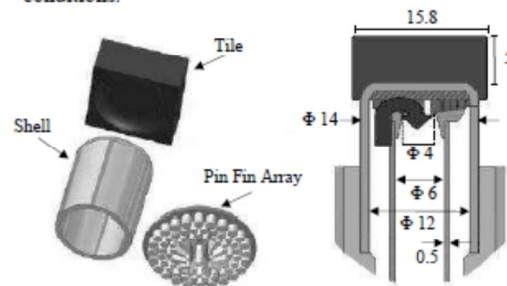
Exploded view [left] and cross-section [right] of the HEMP divertor.¹¹ Dimensions in mm.
